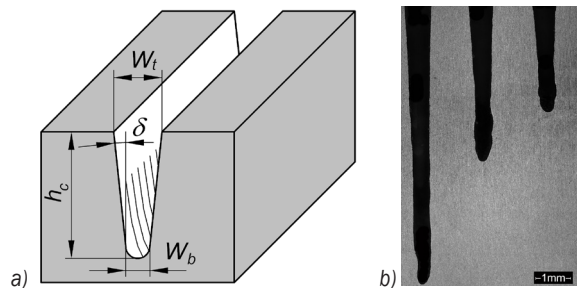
Cut kerf dimensions: a) schematic, and b) optical microscope view
